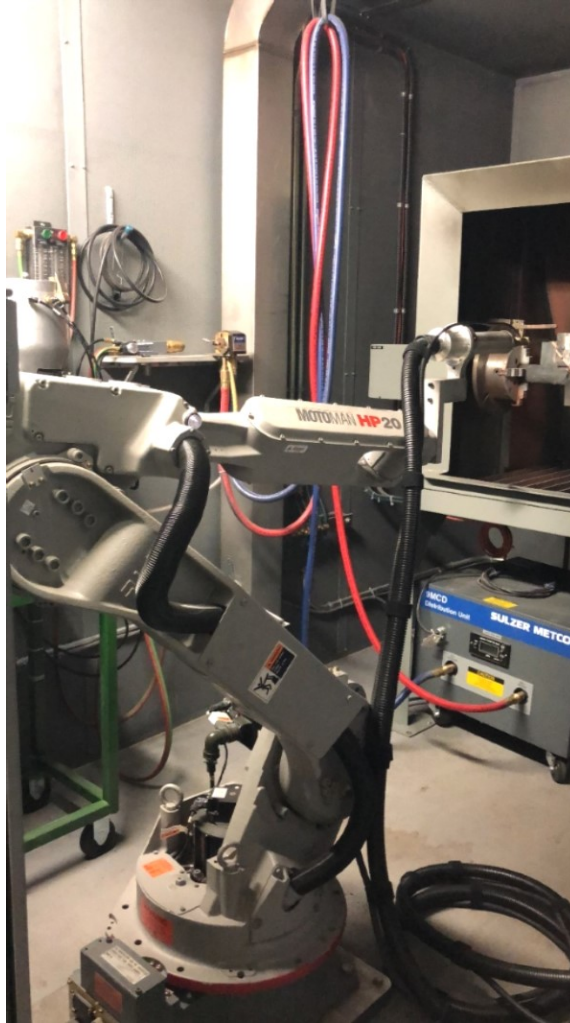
Cold spray gun mounted on the HP-20 Motoman robot
